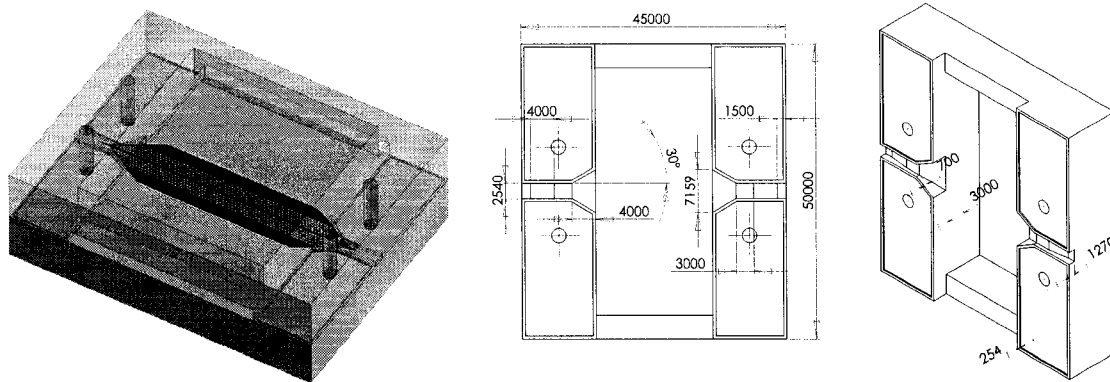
CAD model of an SIIG waveguide test fixture for connection to a millimeter-wave network analyzer (40 mm SIIG section) and drawing with dimensions in  $\mu\text{m}$  (20 mm SIIG section).
